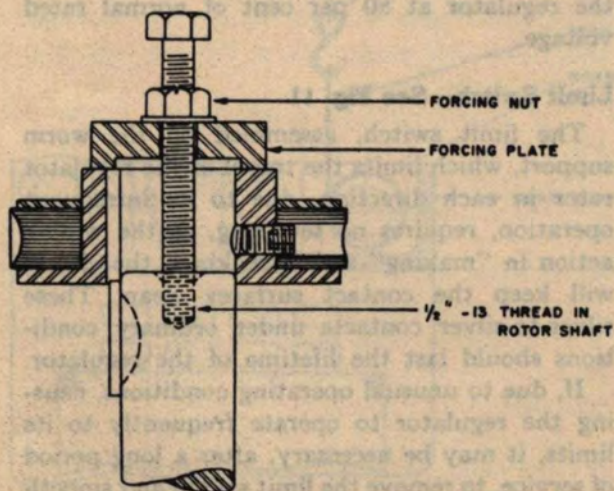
Method used in assembling worm gear, typical of small kva-size regulators
